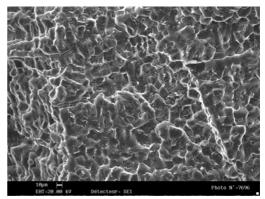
Fracture surface for v_{dis} =0.4 mm/sec.
